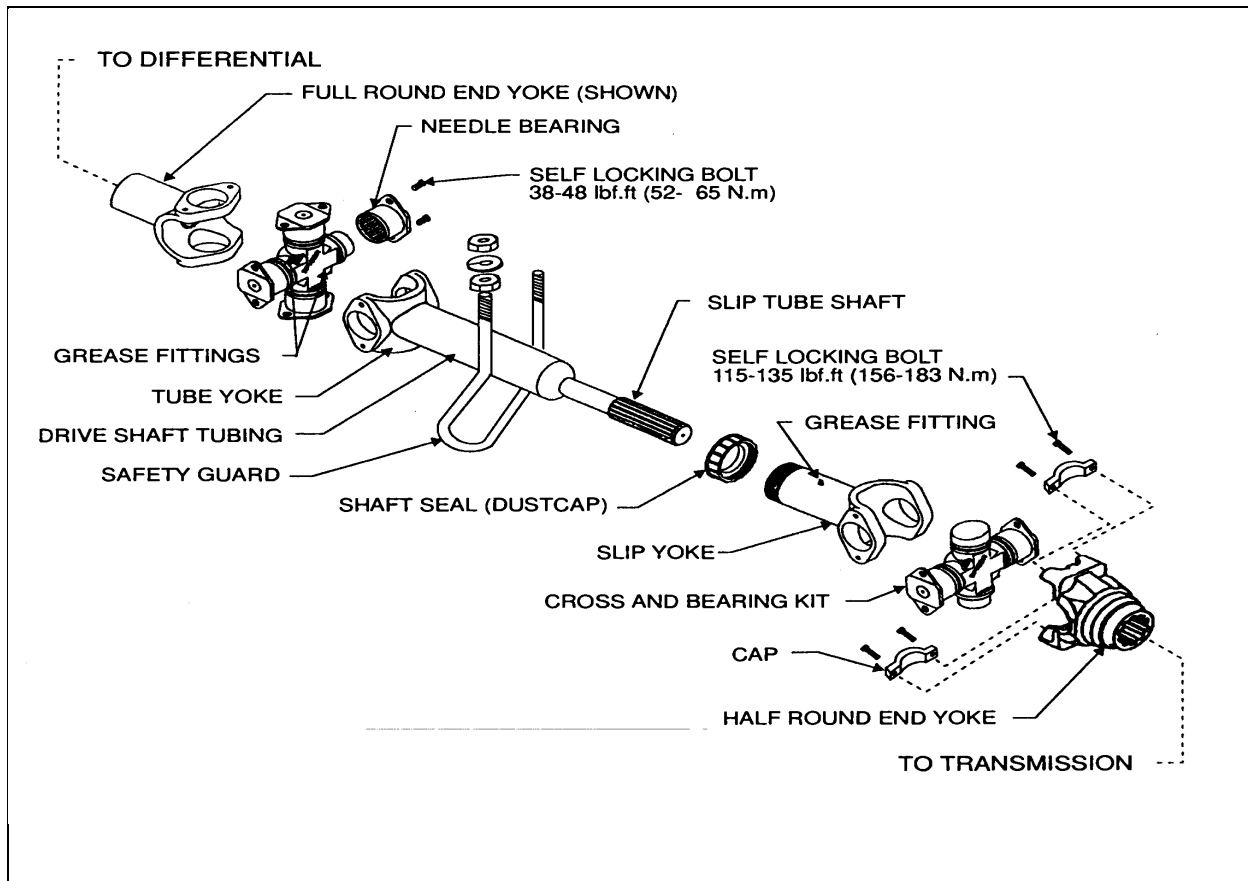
PROPELLER SHAFT ASSEMBLY
